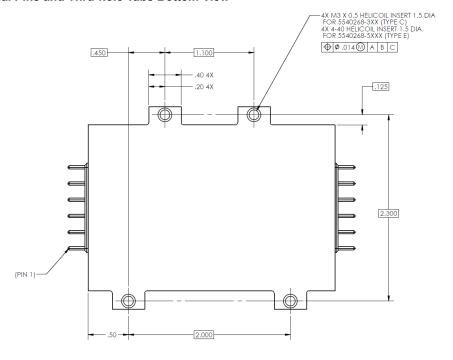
Axial Pins and Thru-hole Tabs Bottom View
